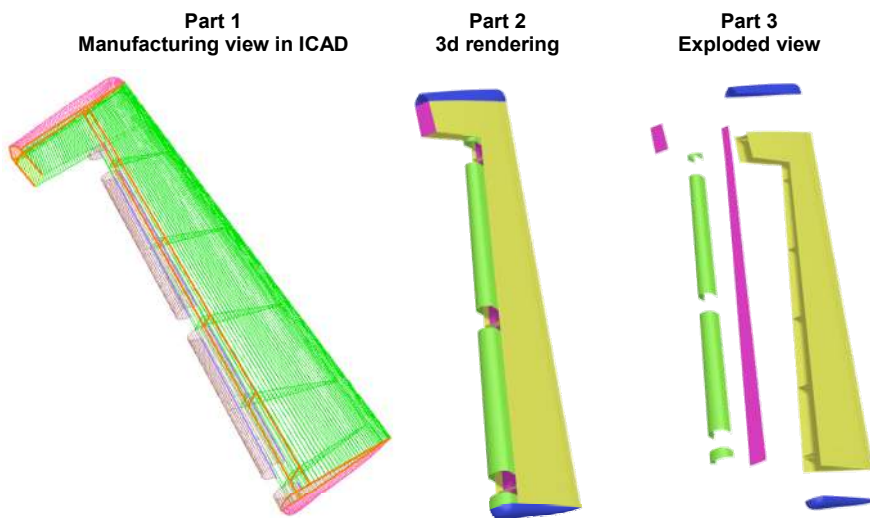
Eaglet manufacturing concept using highly integrated parts
